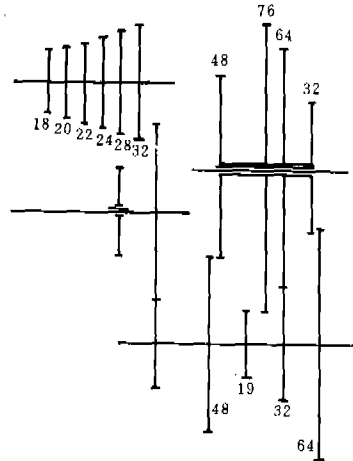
Gear trains for cutting meter screw (Daewoo A-20 lathe)
